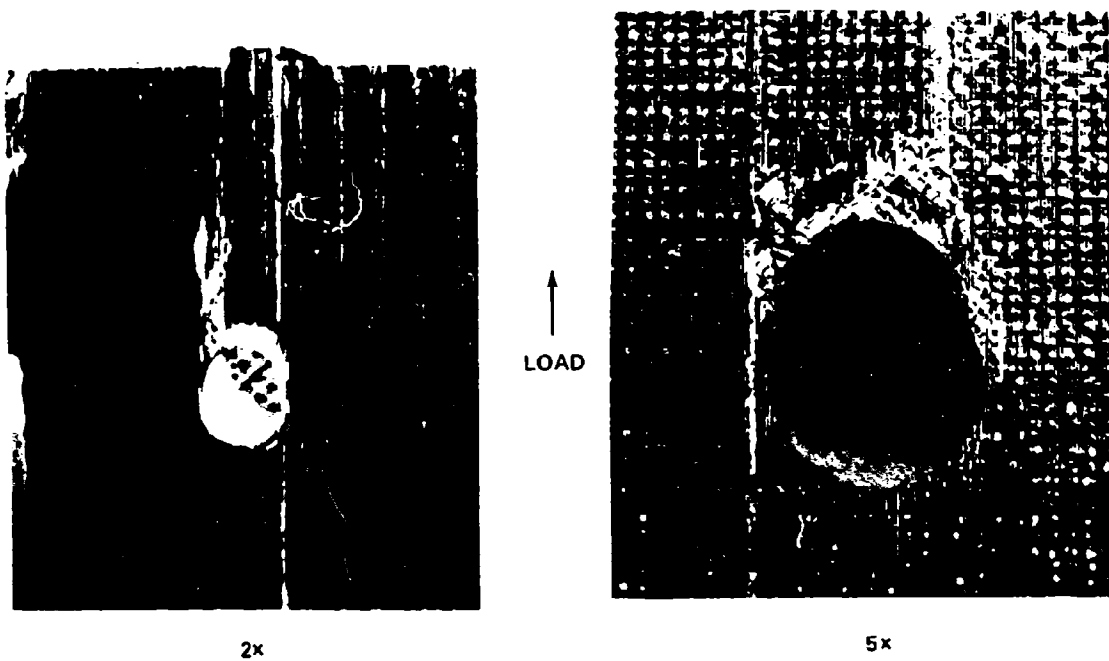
BEARING AND SHEAR-OUT FAILURE IN SPECIMEN Z3824815-1
